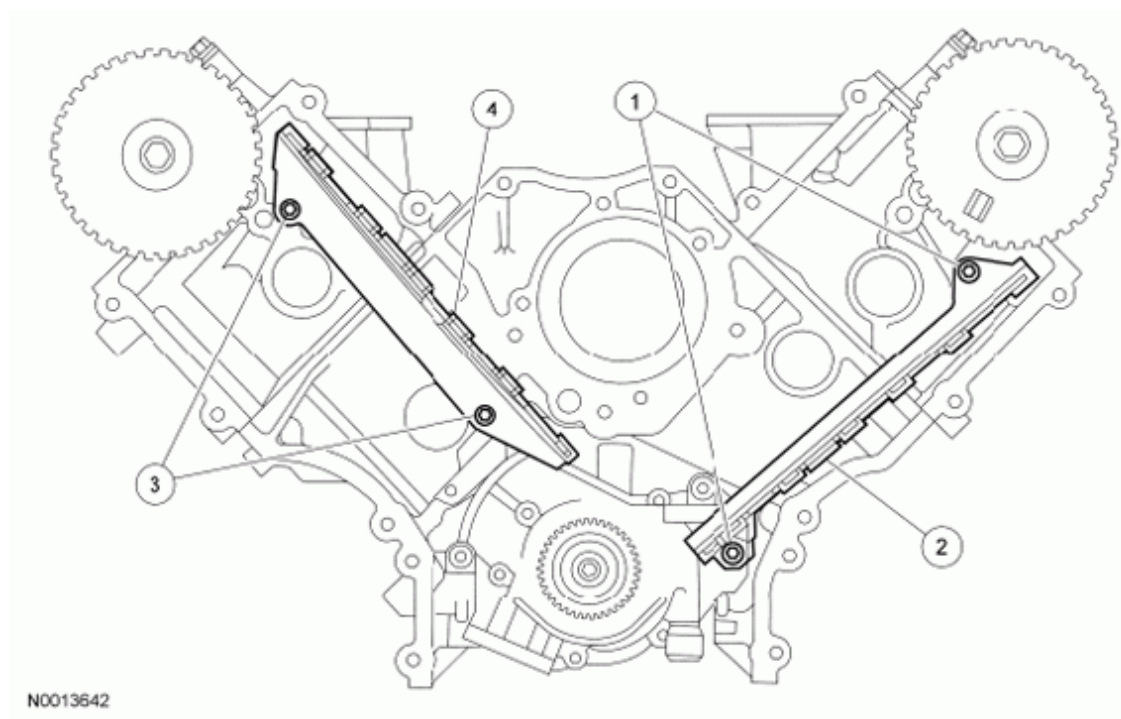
Identifying Timing Chain Guide And Mounting Bolts
